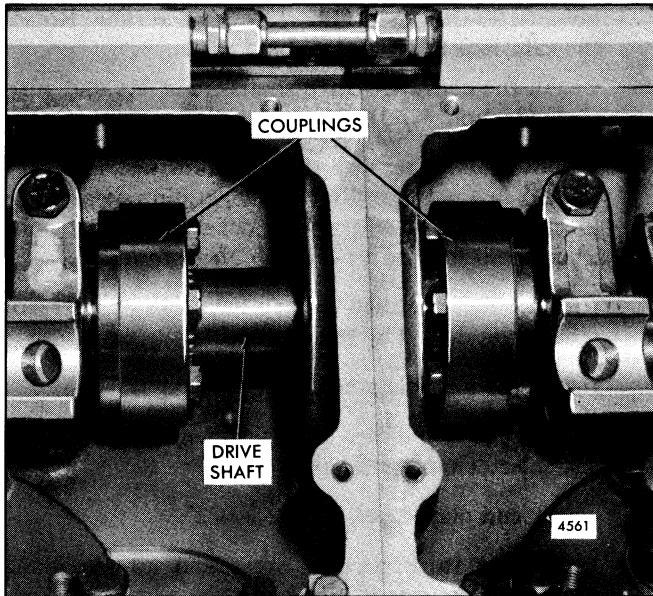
Camshaft Couplings and Intermediate Drive Shaft (Early 12V-149 Engines)
